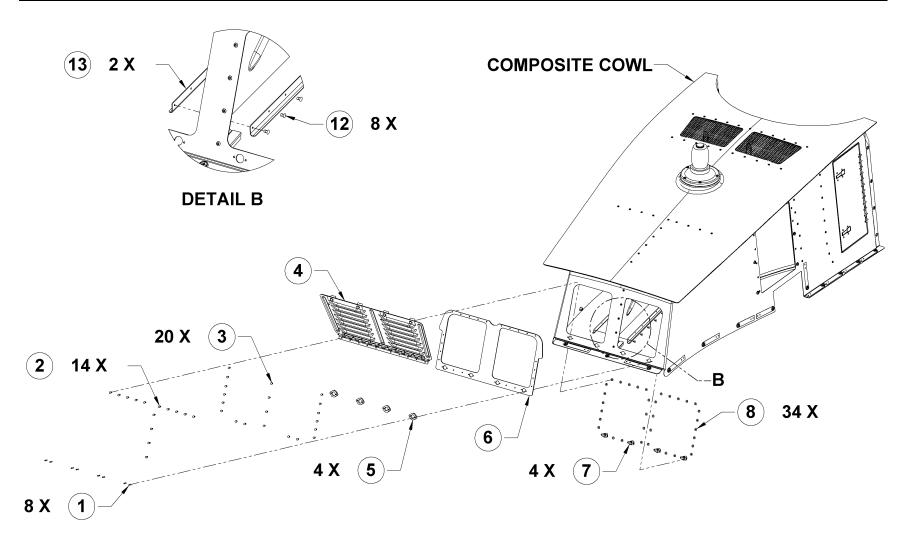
Access Door Kit & Web Doubler Kit (Composite Cowl - Exploded View)
